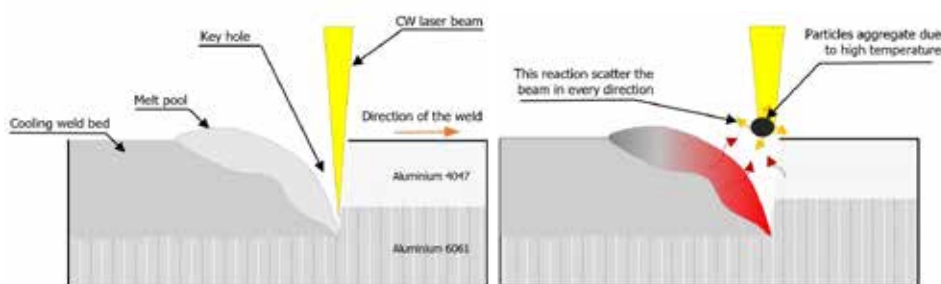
Illustration of keyhole welding (left). Illustration of plasma ball formation (right).
